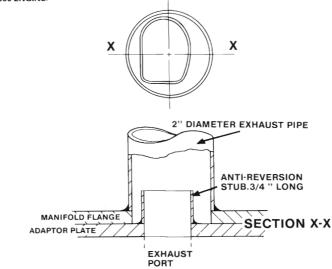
DETAILS OF MANIFOLD ADAPTOR PLATE AND ANTI REVERSION STUB ON 2000 ENGINE.
